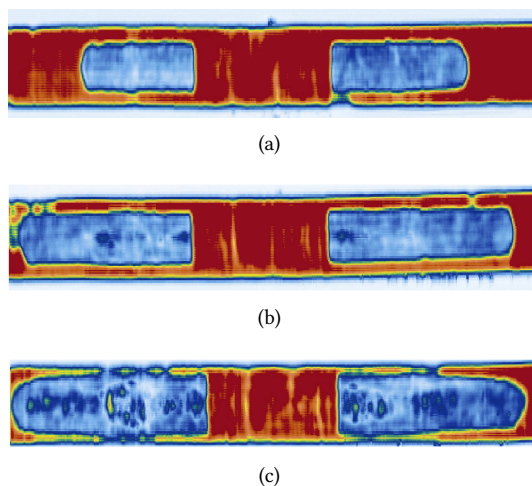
NDI results: a) Partial (kissing) joint; b) Typical weld; c) Overheated specimen with defects and edge delamination.
